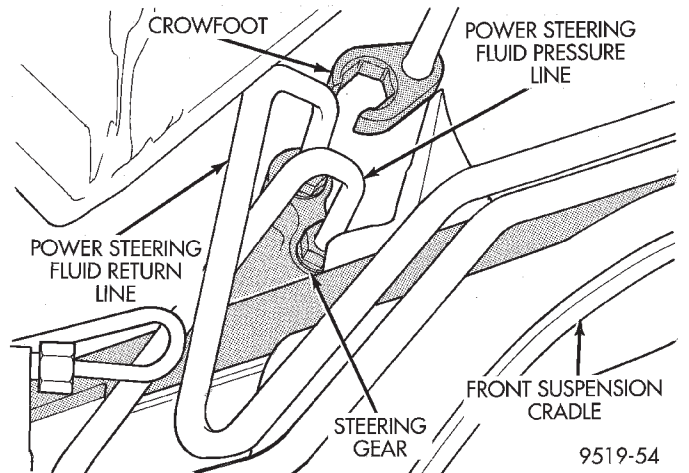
Power Steering Fluid Pressure And Return Hoses At Steering Gear
